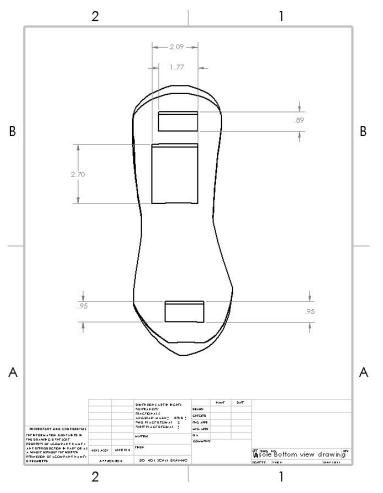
Dimensioned bottom view drawing of SOLIDWORKS Model.
